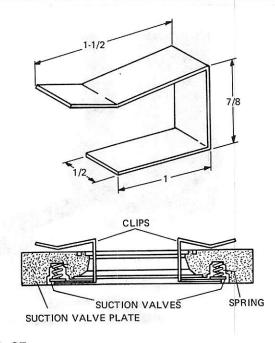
SUCTION VALVE RETAINING CLIPS
